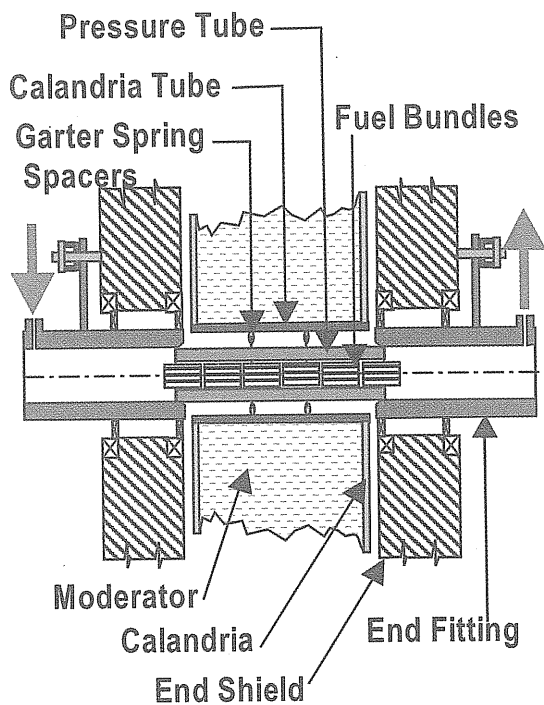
Schematic of a PHWR Coolant Channel Assembly.
